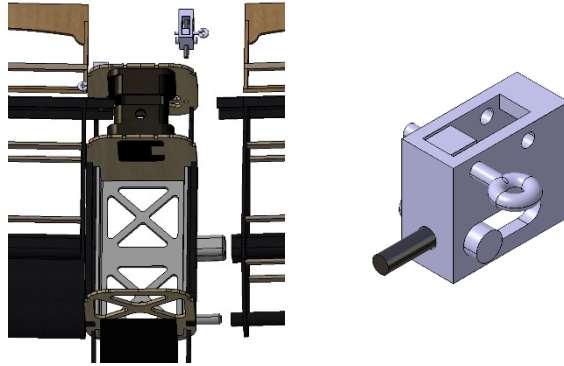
Wing connection (left) and the spring-loaded pin (right)
